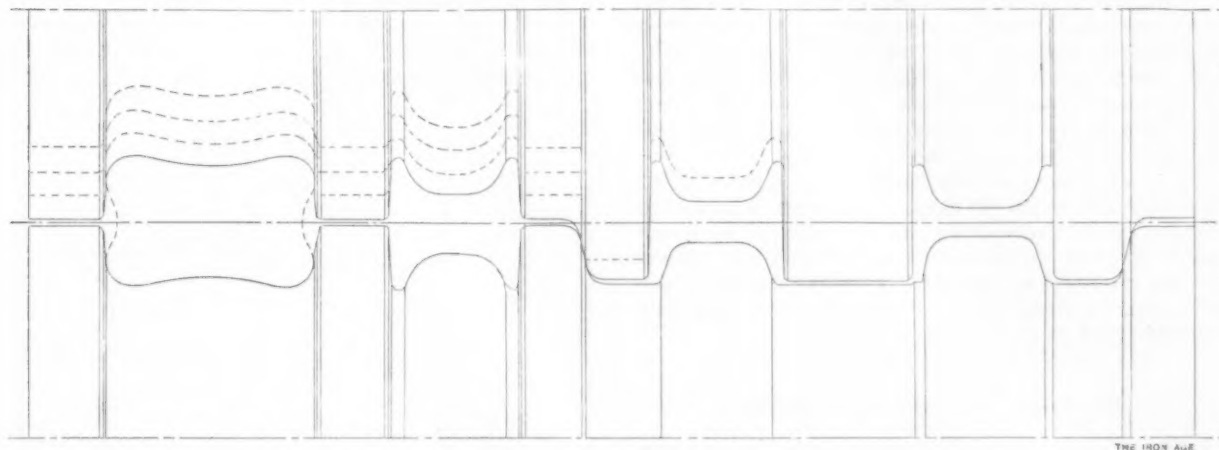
Rolling Beams in a Rail Mill.—Scale, $\frac{3}{4}$ Inch to 1 Foot.
